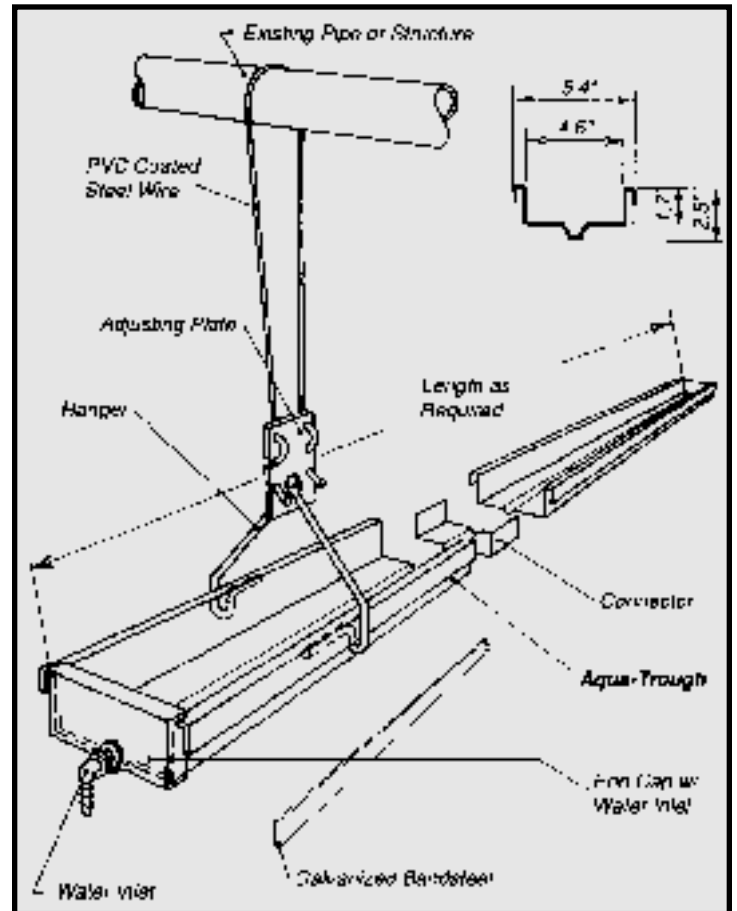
Overall detail of Aqua-Trough™ construction and suspension. Adjustable Hanger Assembly comes complete with coated wire, adjusting plate and hanger.
